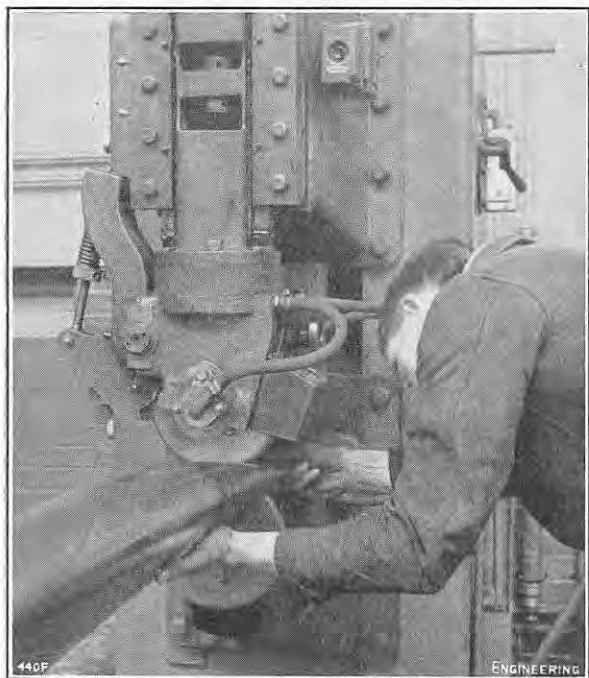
SEAM-WELDING TIP OF CORE TUBE.
